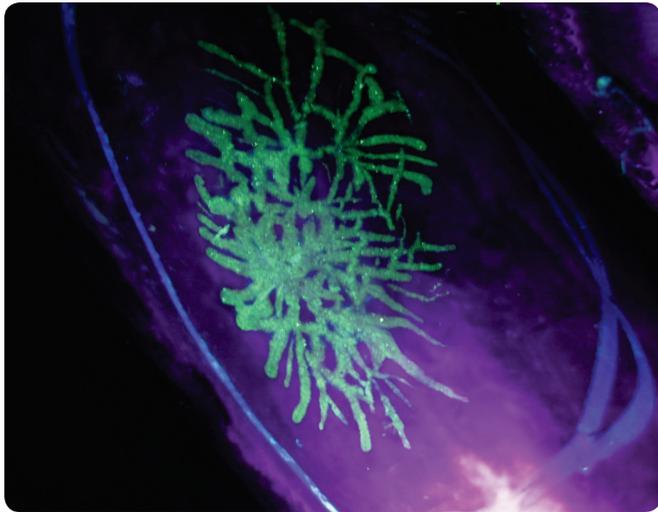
Stress corrosion cracking as revealed by fluorescent liquid penetrant inspection.
